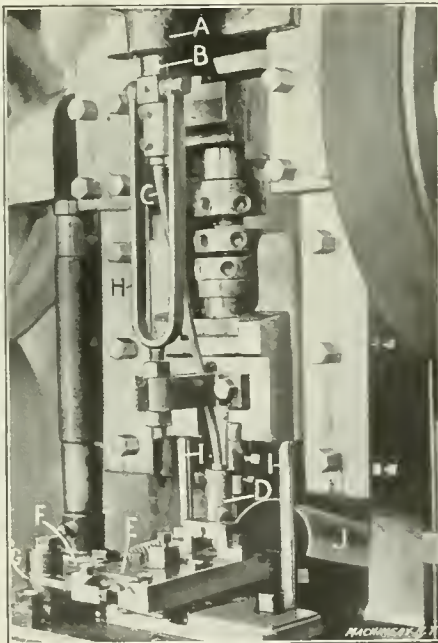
Automatic Swaging Machine which forms the Slug into a Bullet
